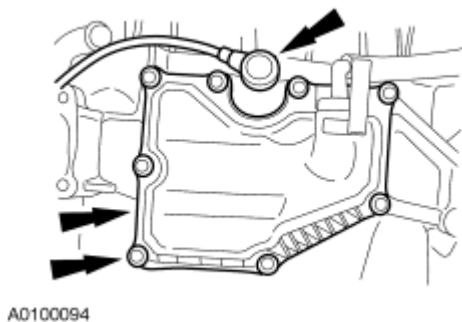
Locating Crankcase Vent Oil Separator, KS And Bolts
